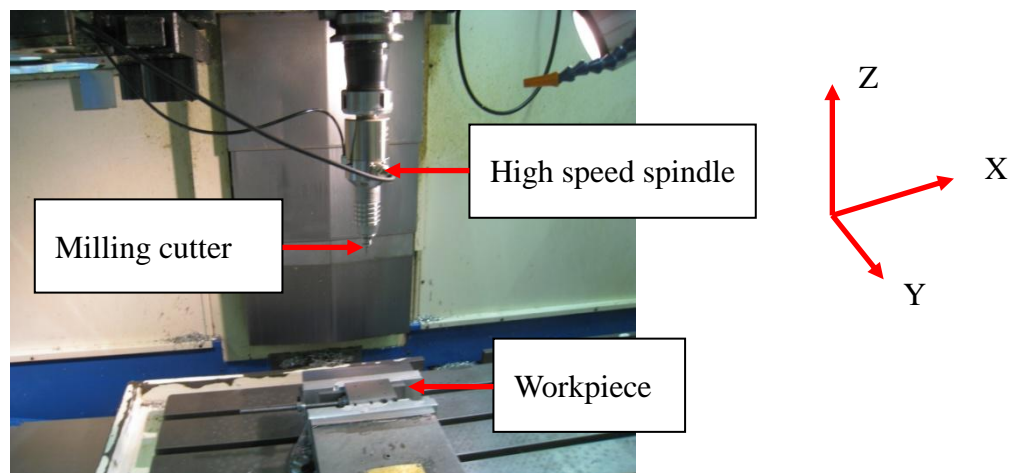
Setup for machining micro fluidic mould using a high speed spindle
